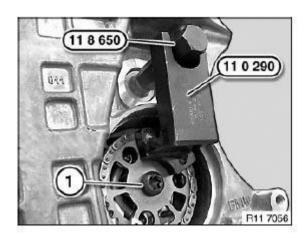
Identifying Special Tools (11 8 650 & 11 0 290) On Screw Courtesy of BMW OF NORTH AMERICA, INC.
